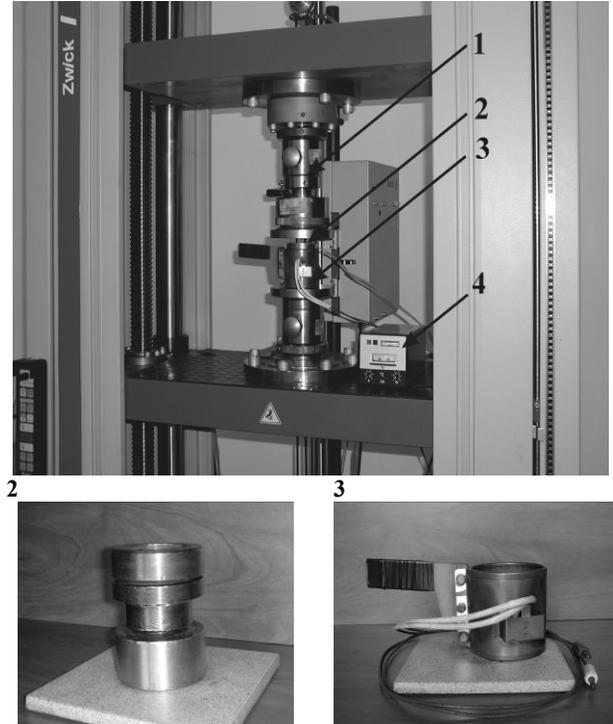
View of the composite material forming stand: (1) testing machine set up for compression; (2) die block, (3) heater, and (4) thermometer
